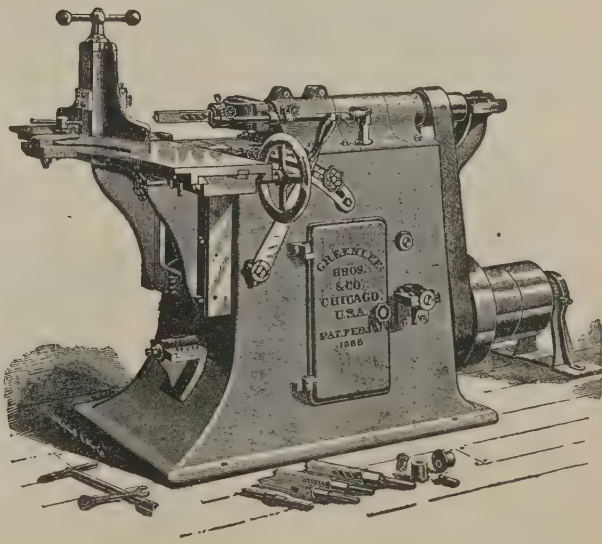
HOLLOW CHISEL MORTISING MACHINE.
